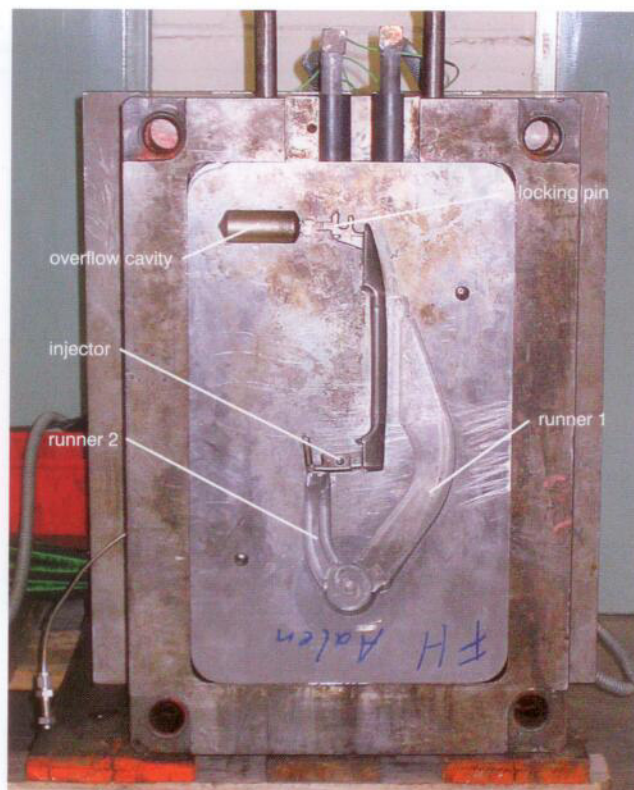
Pressure die casting tool for gas injection and a 200 t cold chamber casting machine
